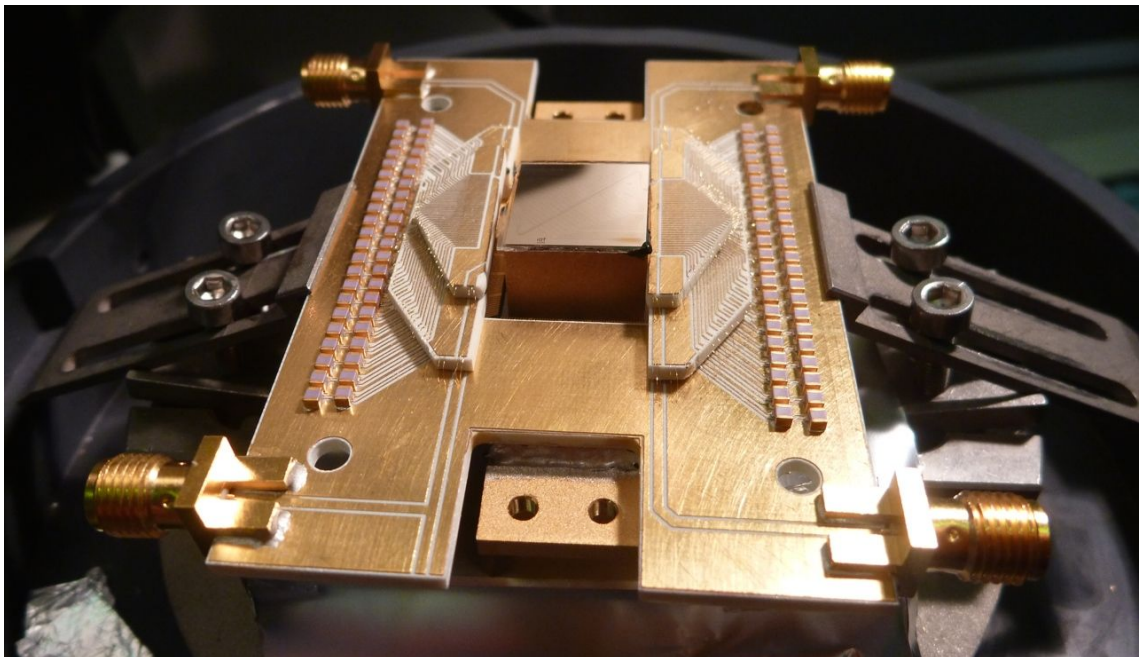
The final assembled in-vacuum filter PCB with 88 surface mounted capacitors and four edge mounted SMA connectors.
